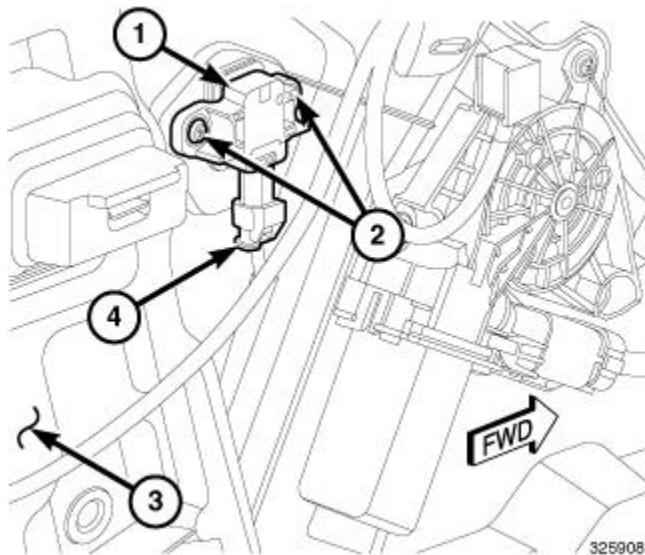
Front Door Wire Harness Connector, Side Impact Sensor, Two Screws & Front Door Hardware Module Carrier Panel
